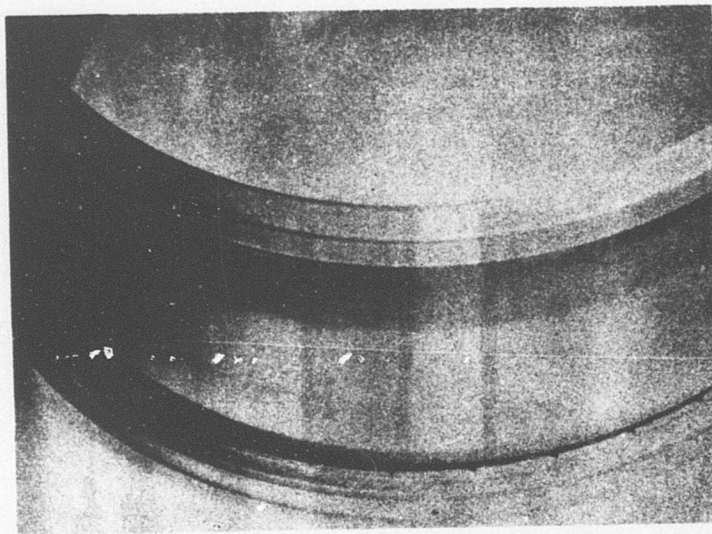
View of Cone Race Surface - Bearing S/N 73-69
